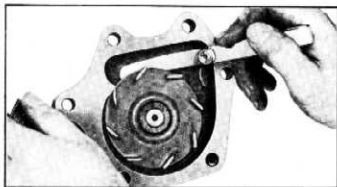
Checking Clearance Between Face of Rotor and Pump Body
